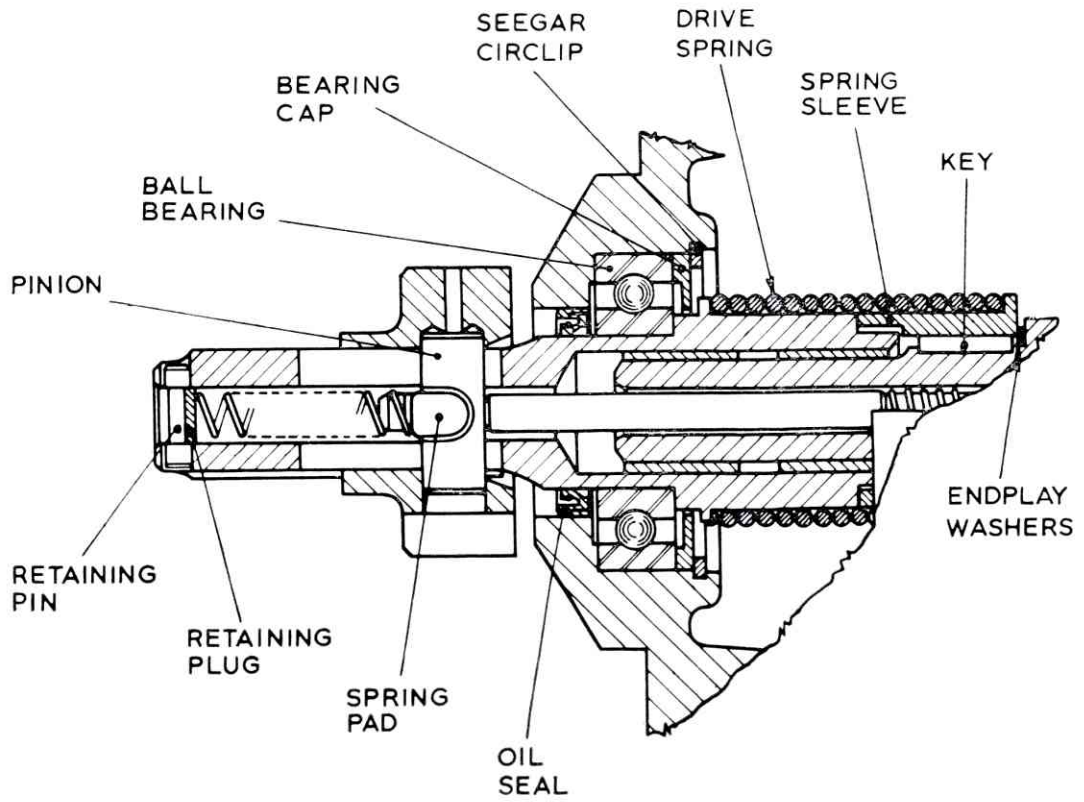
SECTION THROUGH THE STARTER MOTOR PINION
